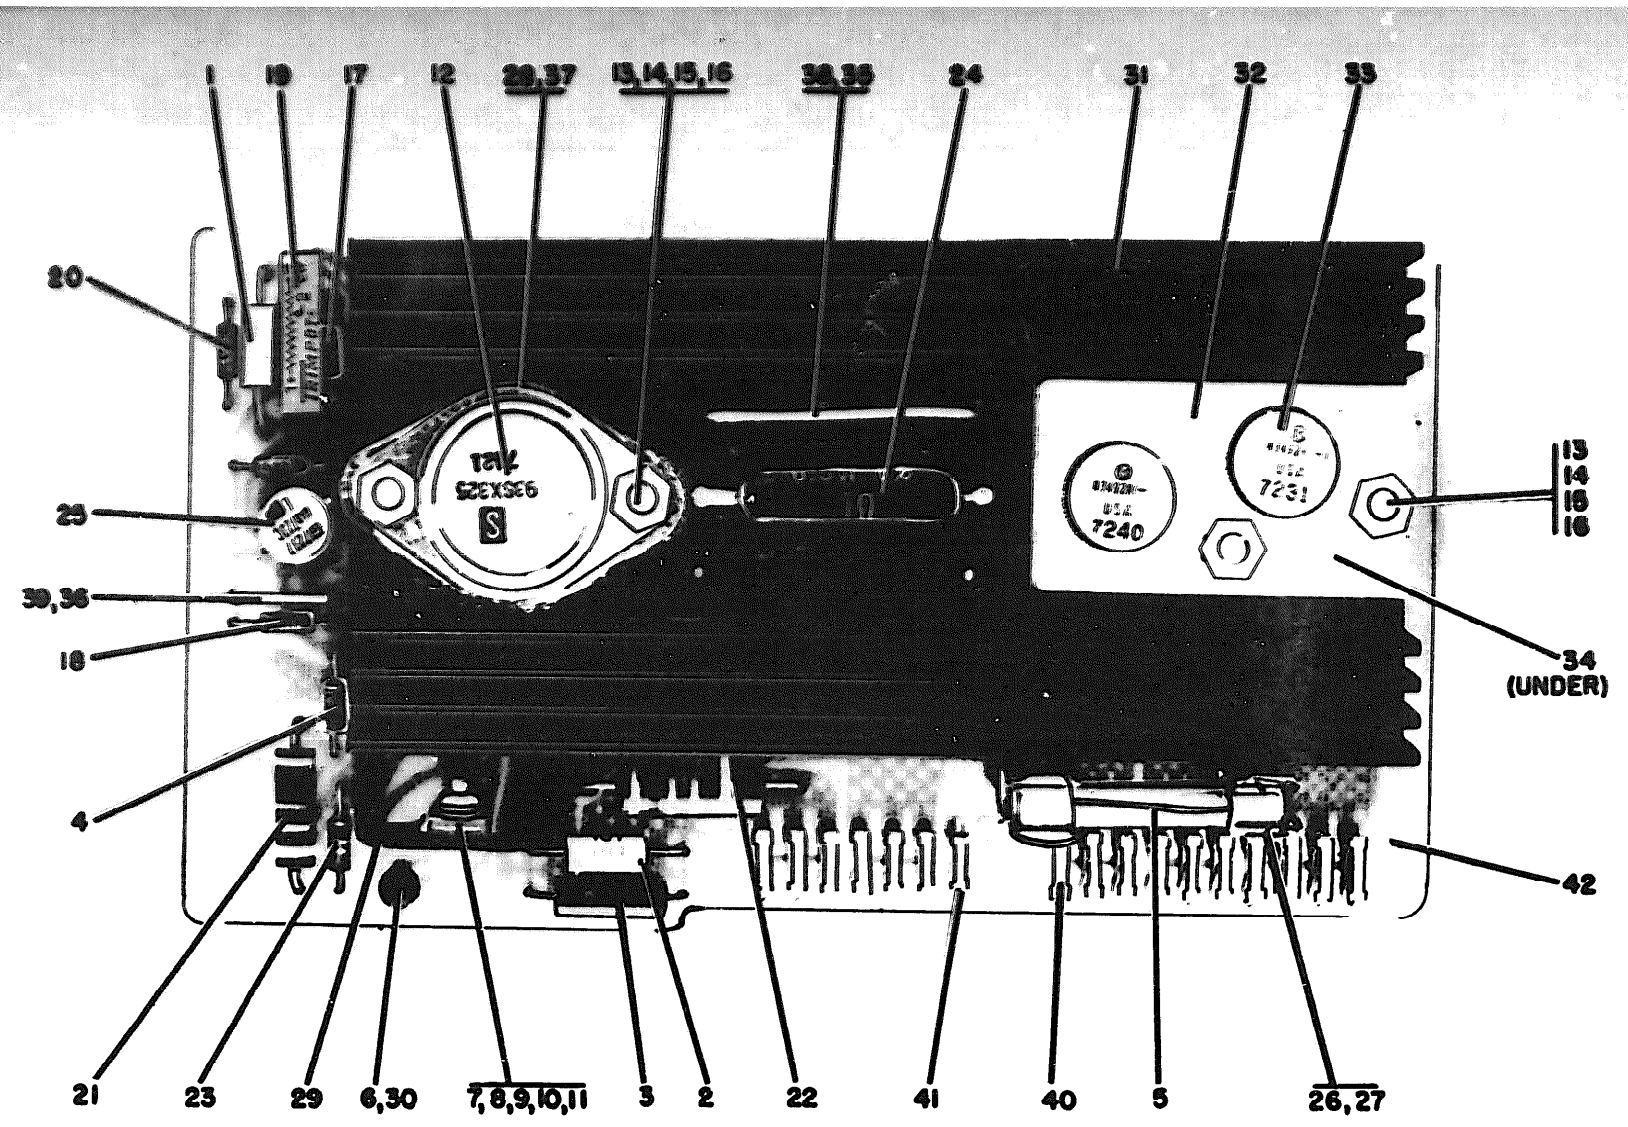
Circuit Card Assembly, -12V Rectifier and Regulator
